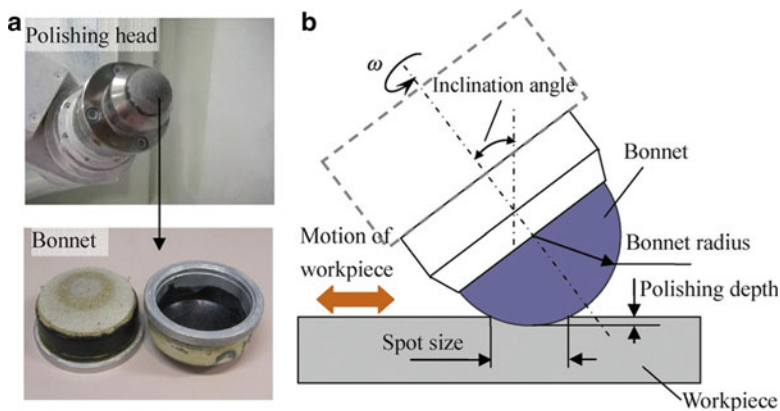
Cutting mechanics for CCUP based on mechanical polishing: (a) polishing tools; (b) polishing geometry
